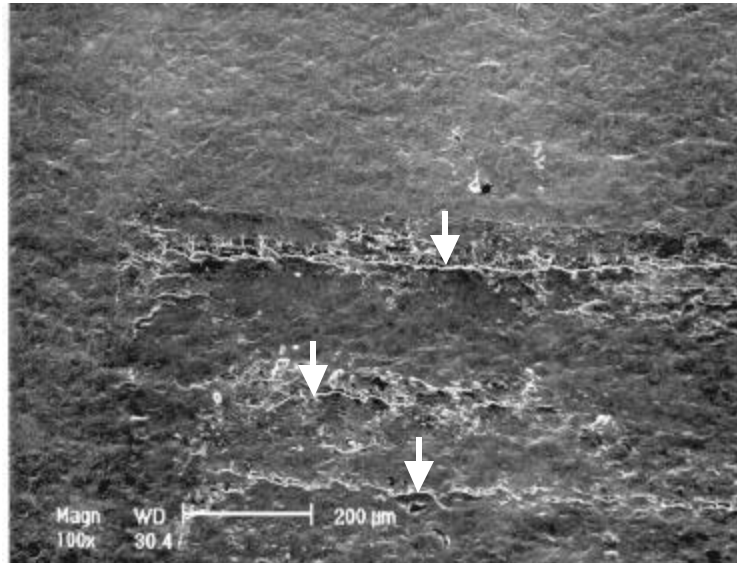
E.33. Propagating fretting fatigue cracks formed near the contact edges and at the center of the fretted region (Specimen 633). Three-point bending was used to open up the cracks to ensure that they were indeed cracks.
